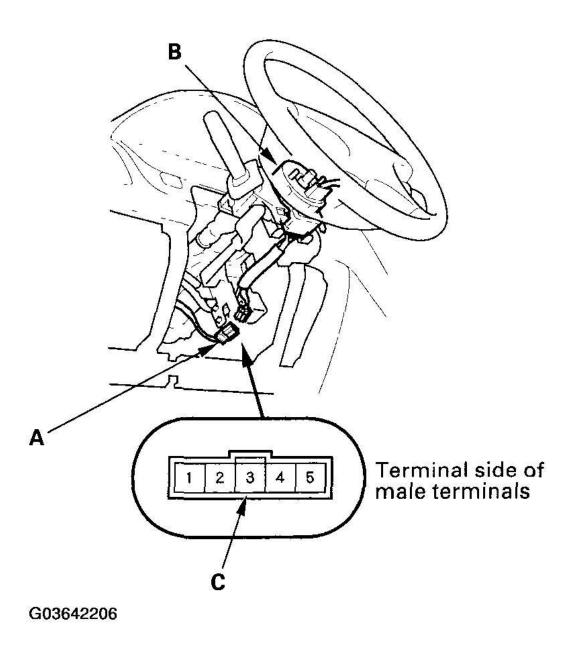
Disconnecting Dashboard Wire Harness B 5P Connector From Cable Reel Courtesy of AMERICAN HONDA MOTOR CO., INC.
